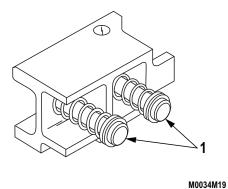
Ogive Plunger Assembly and Round Positioning Block Inspection.
